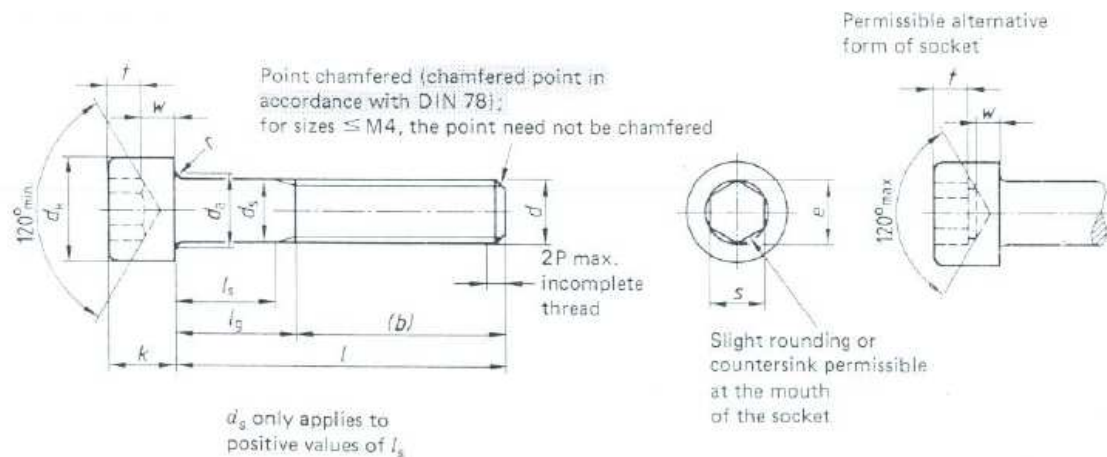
Hexagon socket head cap screws DIN913 [Kirk, (2012)].
